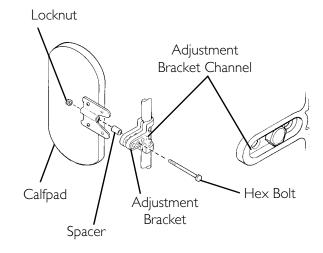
Adjusting Genius Legrests - Calfpad Height/Calfpad Depth
